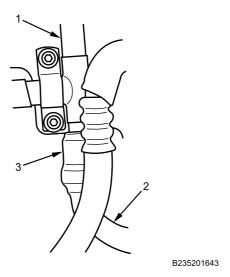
HVAC Compressor Discharge Hose at T-fitting.
